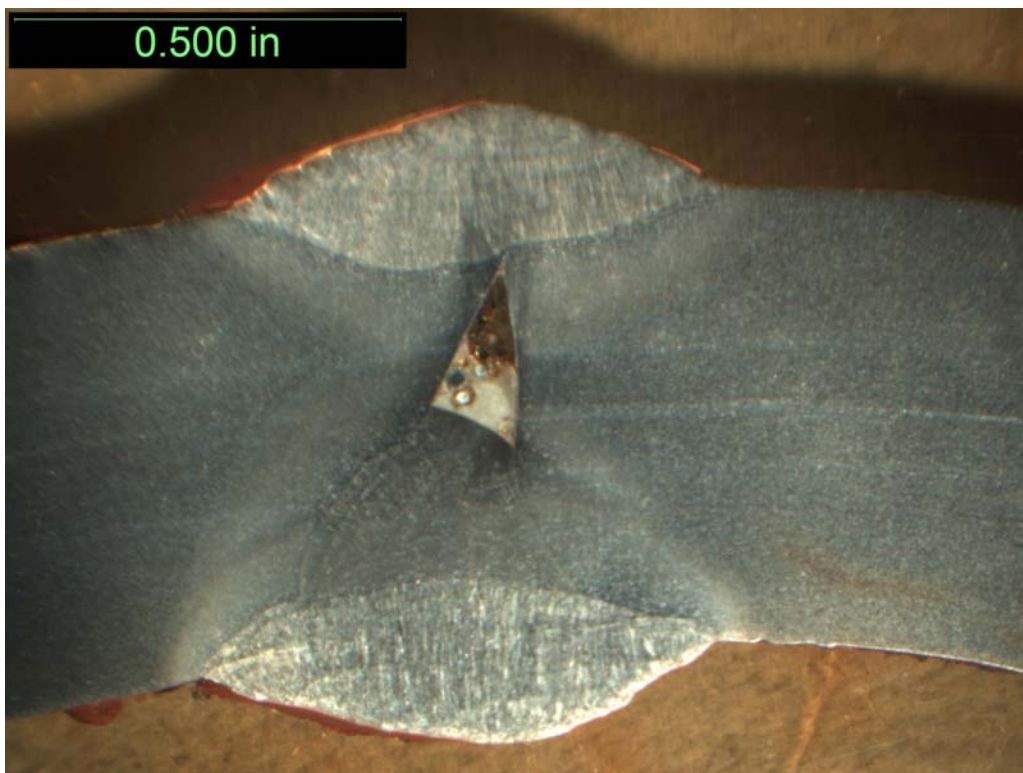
Cross-section prepared through intact weld area. Note lack of penetration between welds and curvature showing top weld was in tension while bottom weld was in compression during buckling.
